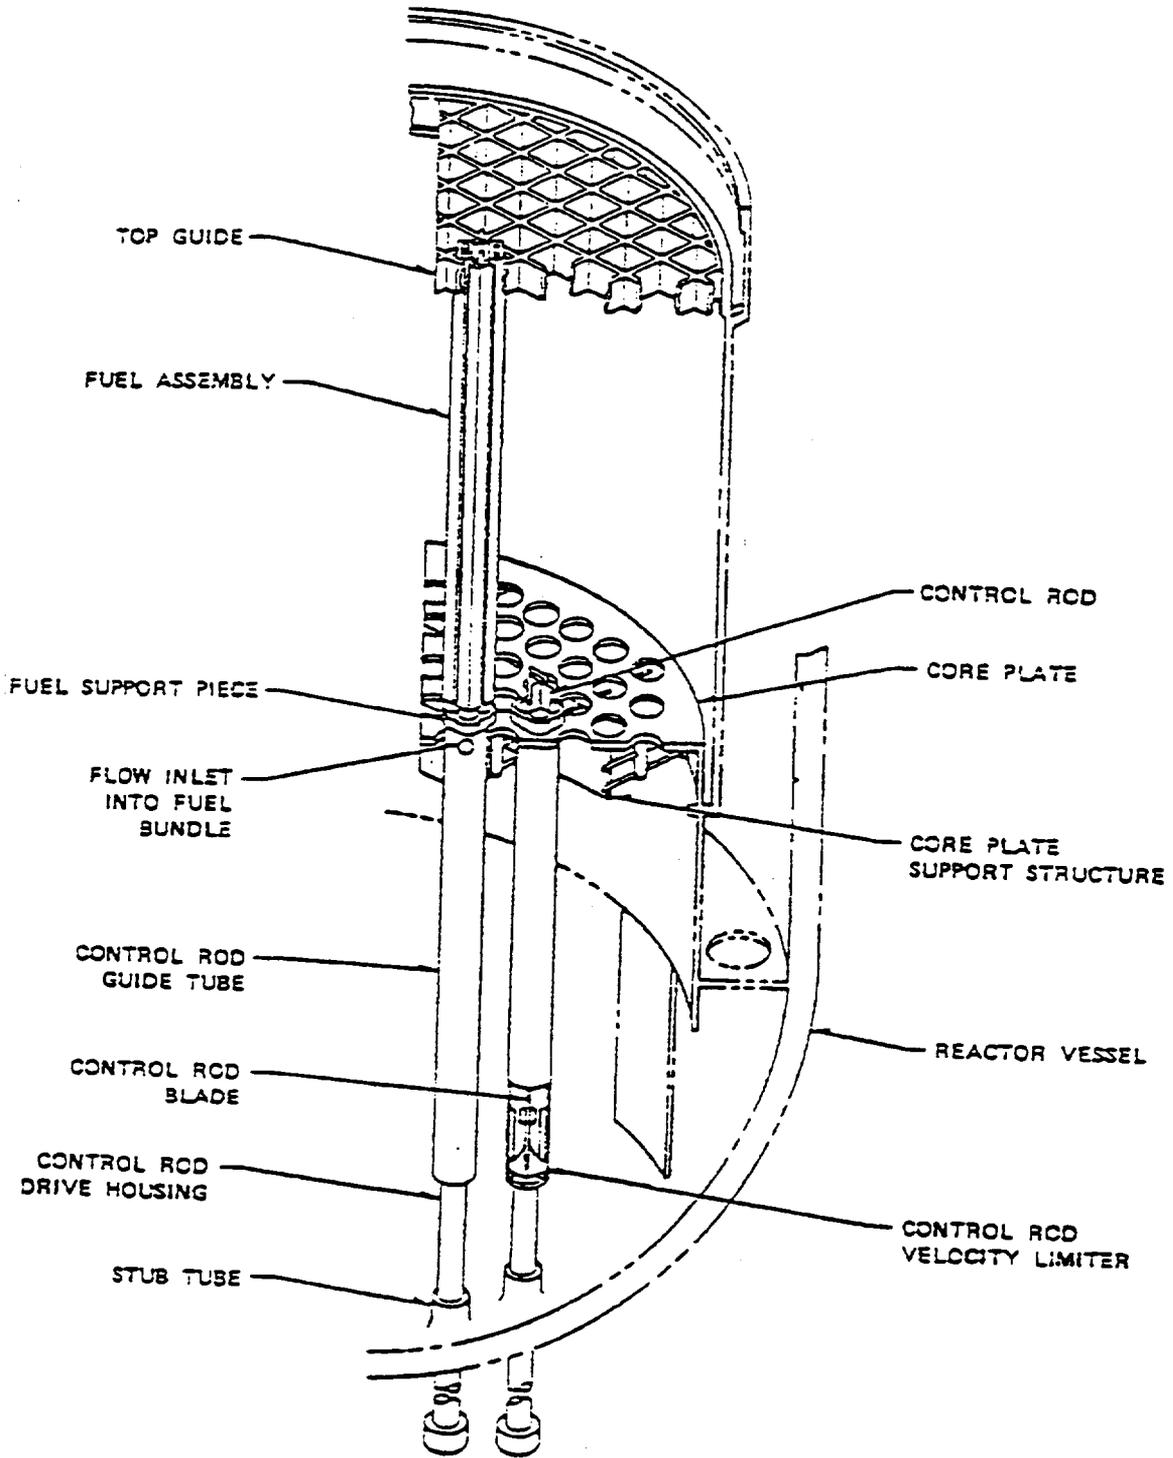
Typical control rod and drive assembly inside the reactor vessel.
